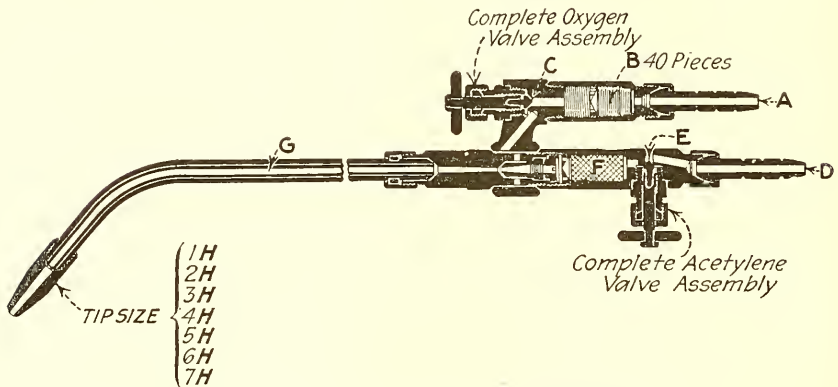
Details of Presto-O-Lite Type H Welding Torch.
